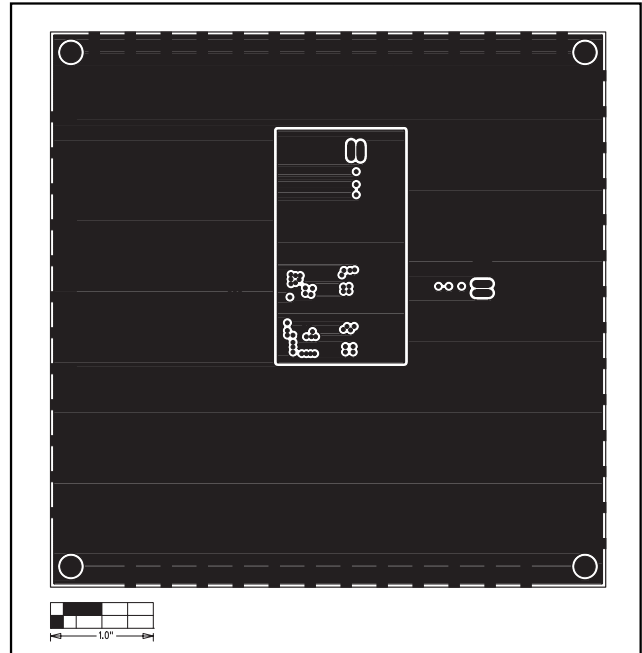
MAX9311 EV Kit PC Board Layout—Solder Side (VEE/GND)
